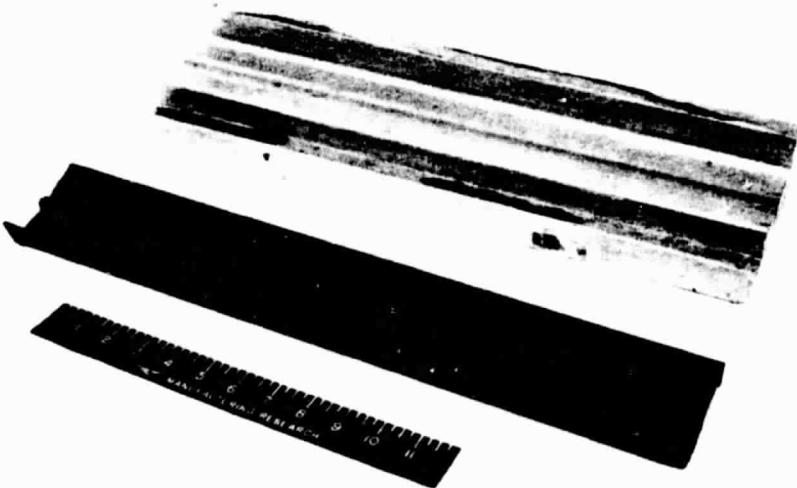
Rubber Bead Insert in Aluminum Tool
